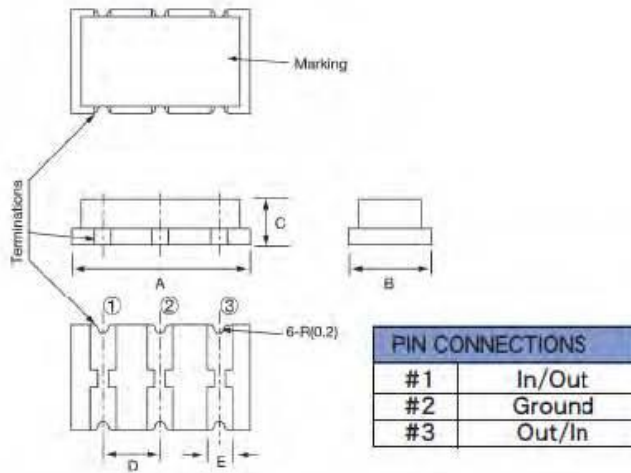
ZTT CW Series - Top, Side, Bottom & End views
